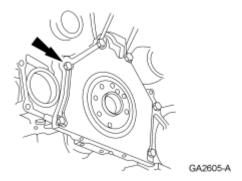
Applying Bead Of Gasket Maker To Rear Crankshaft Seal Retainer Courtesy of FORD MOTOR CO.
